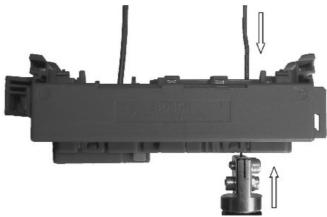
89-way module, terminal removal Abb. 27: Modul 89-polig, Kontaktdemontage
